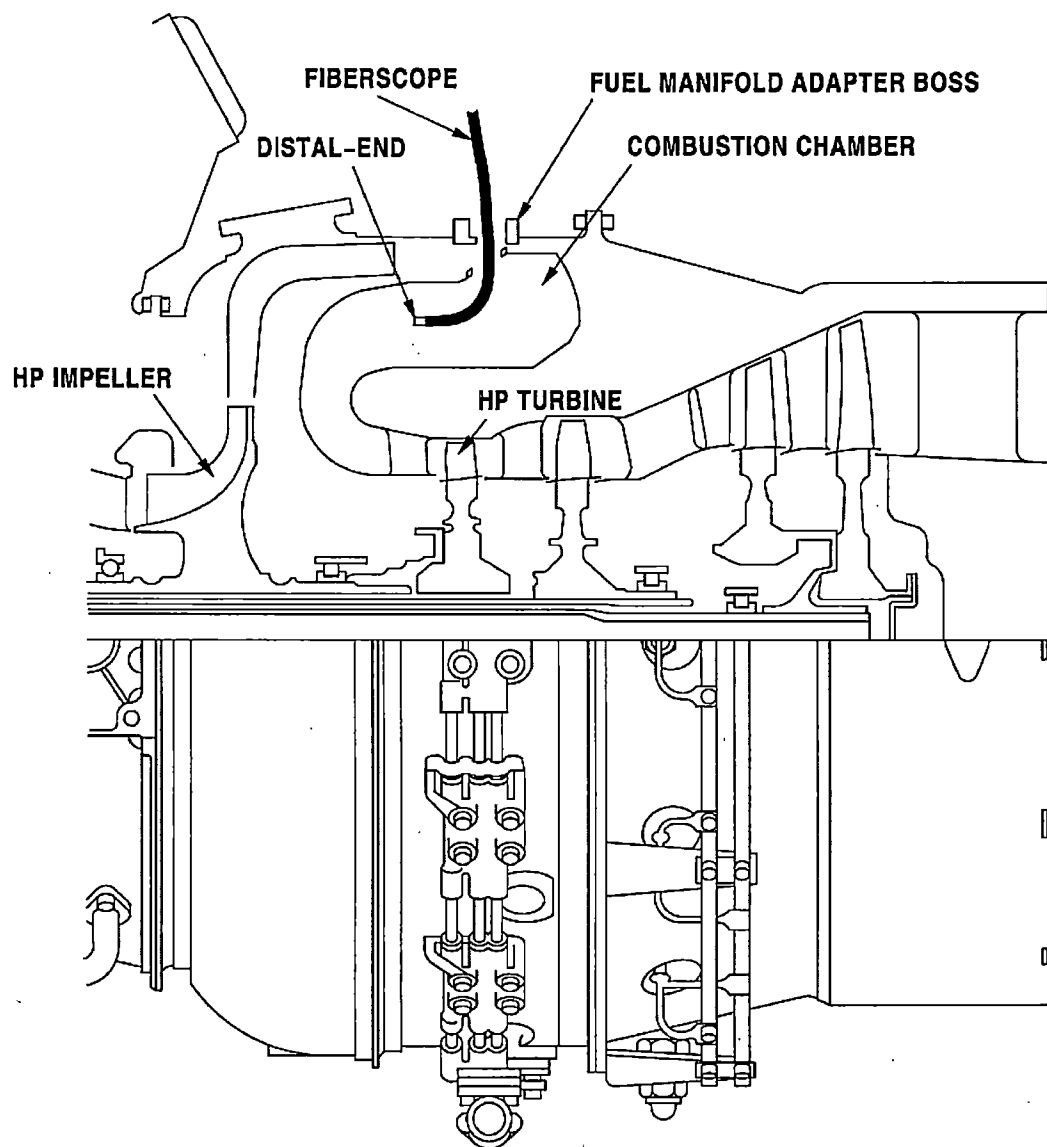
Combustion Chamber Liner Assembly – Boroscope Inspection
